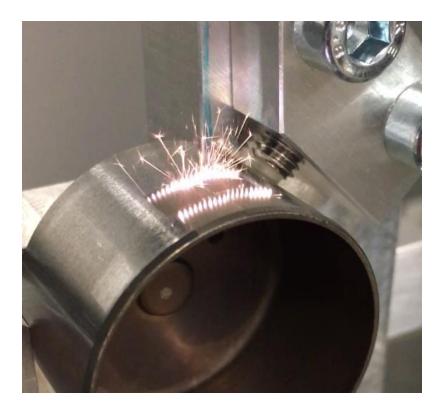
Laser structuring of a part provided by an end-user in the project using the multi-beam optics integrated in the developed machine tool
